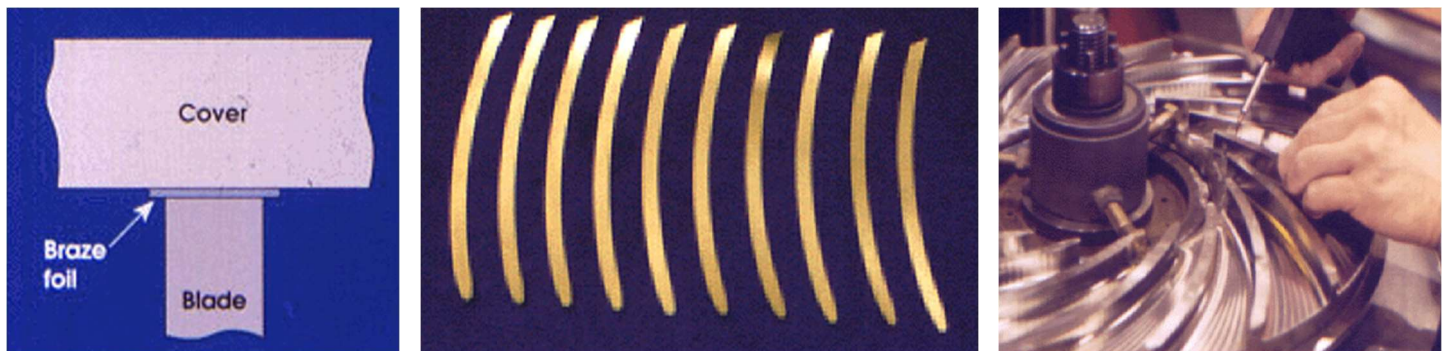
Braze joint schematic at left – Braze foils in center – Braze foils being placed on impeller blades at right
